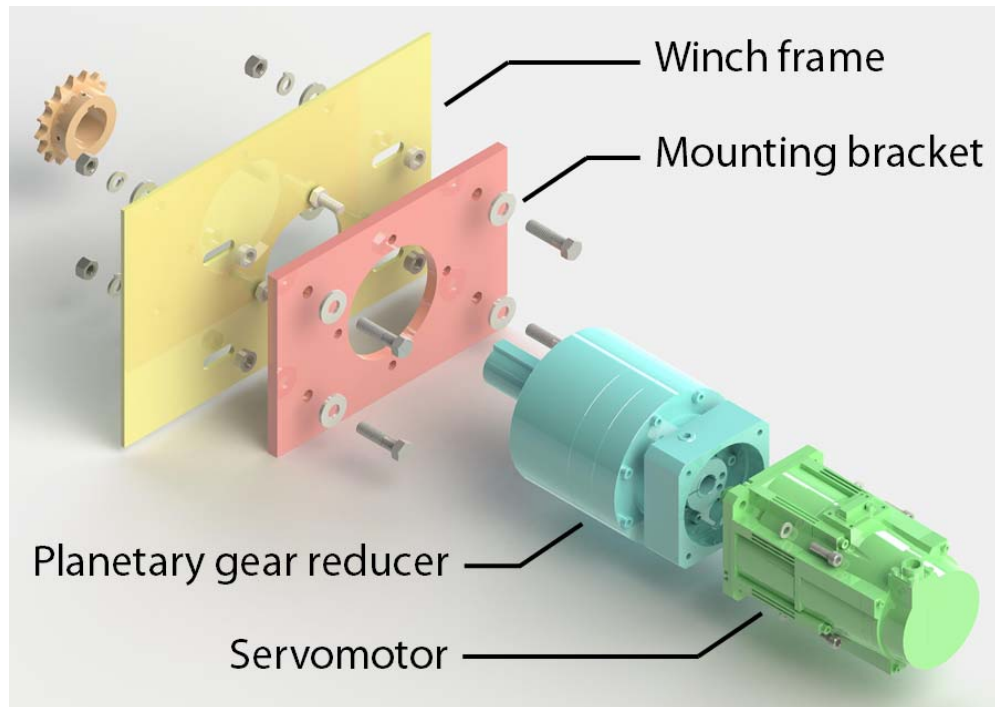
SolidWorks assembly of how the servomotor, gear reduction drive, mounting bracket, and winch will come together.
